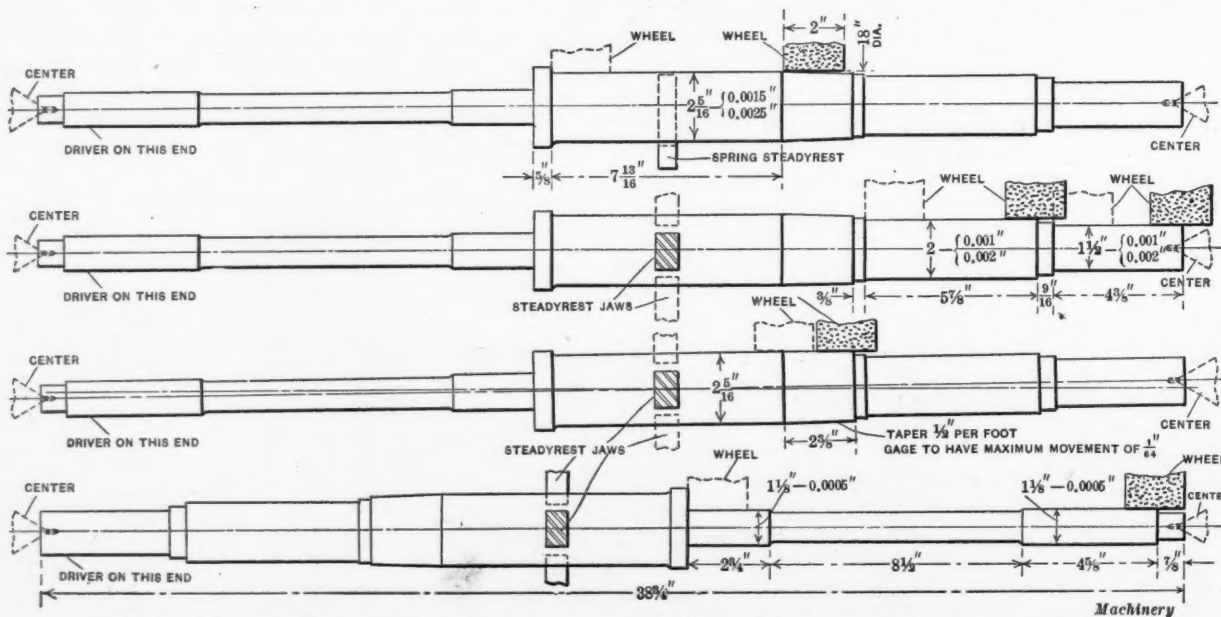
Example of grinding a Shoulder Shaft illustrating Use of Center Type of Steadyrest for supporting the Work
